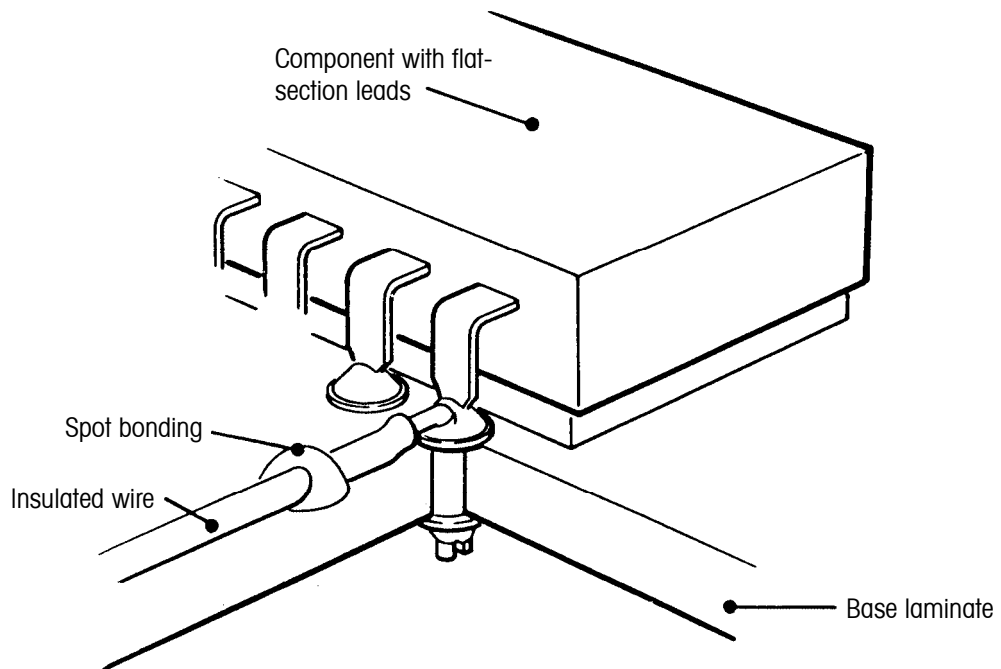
Addition of a wire link into a plated through hole occupied by a flat-section lead (wire link entering from the component side of the board)
